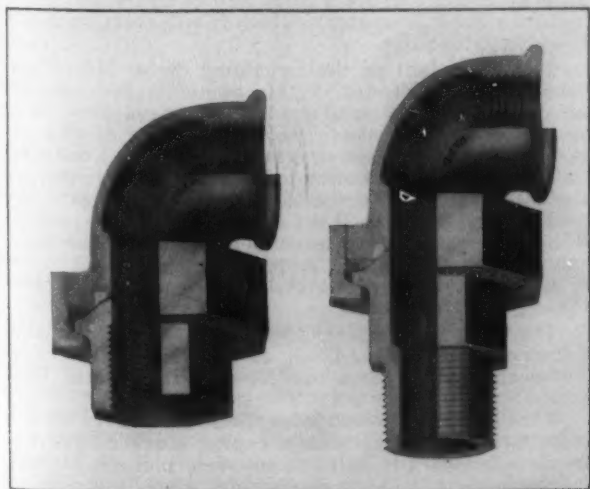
The Elbow With Internal Threads. Fig. 2.—The Elbow with External Threads.
